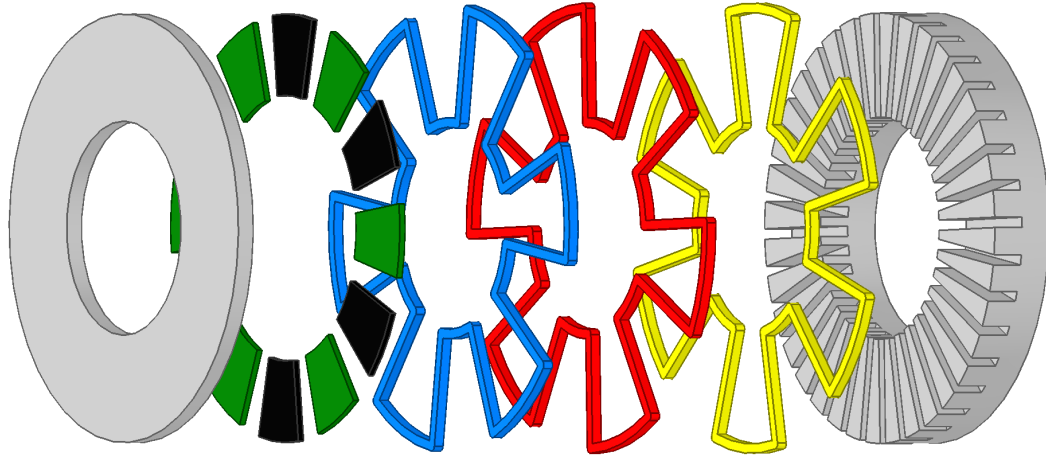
Exploded view for the baseline surface-mounted axial-field PM machine with 36 stator slots and 12 rotor poles. This machine employs wave type distributed windings.
